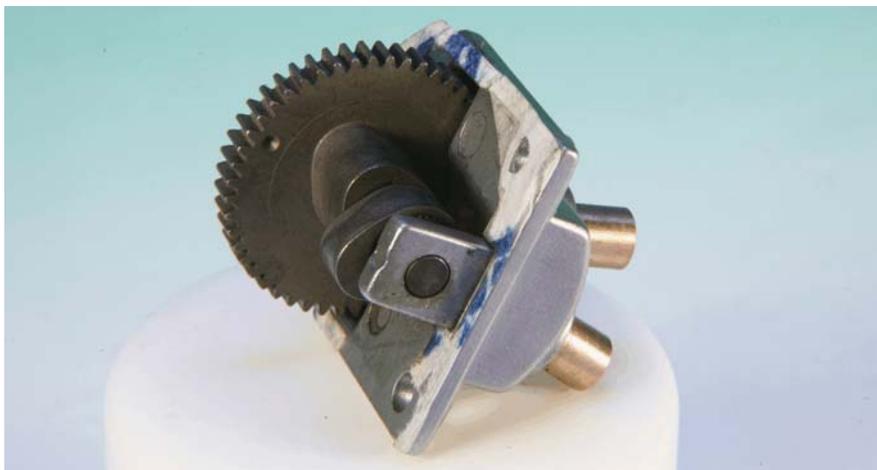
Sintered metal cam and cam gear assembly. The visible dot on the side of the gear is the timing reference.
